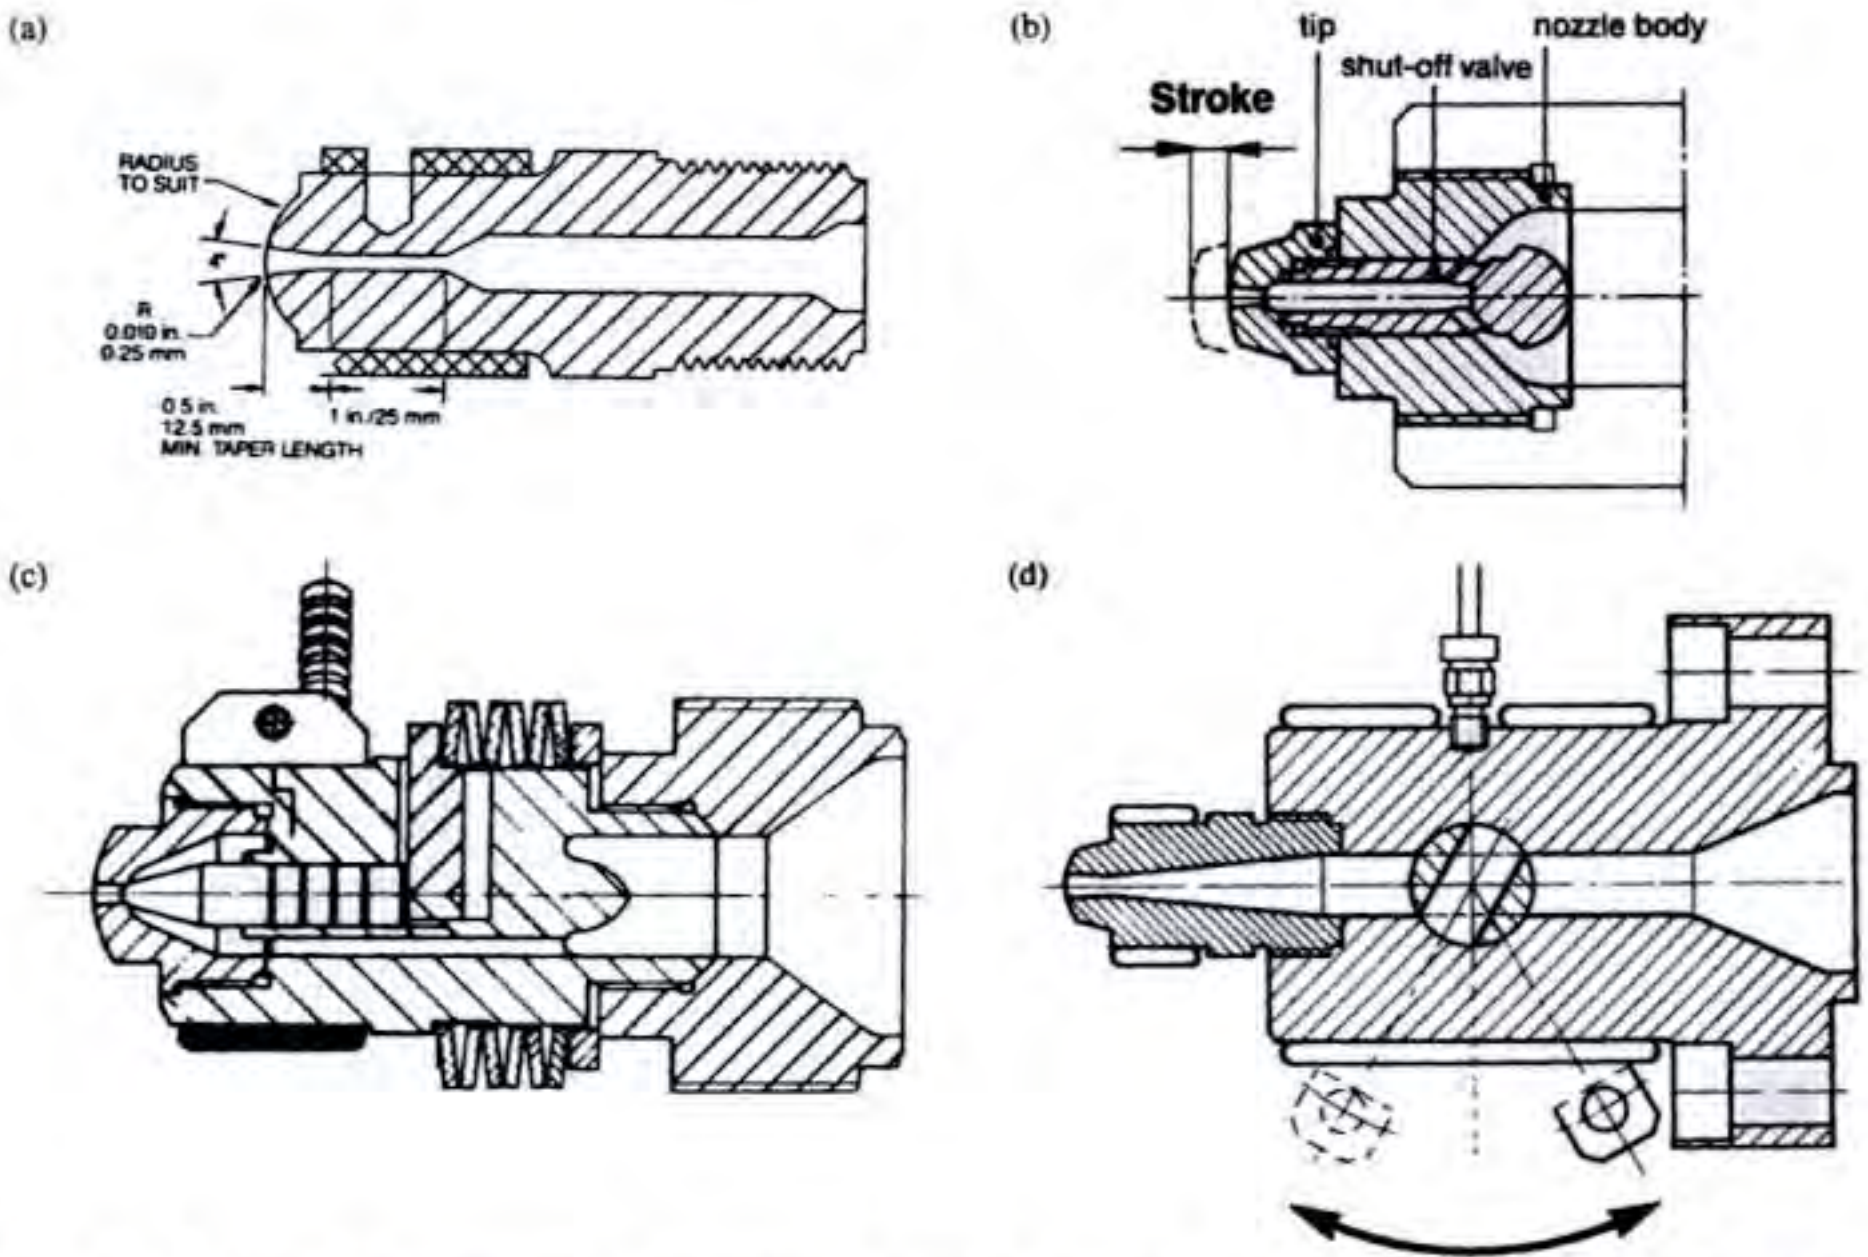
Nozzle designs: (a) Conventional reverse tapered nozzle. (b) Sliding shutoff nozzle. (c) Spring-operated valve nozzle. (d) Mechanical shutoff nozzle, usually operated hydraulically.
